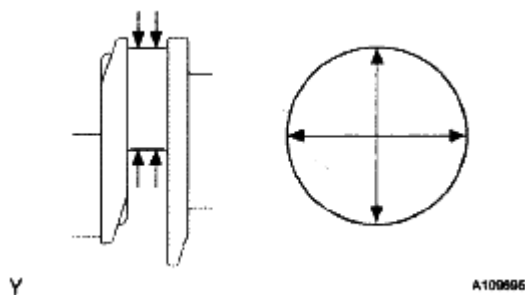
Checking Crank Pin For Taper And Out-Of Round
